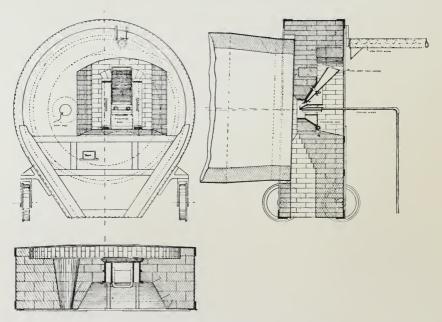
Removable Kiln-head with Matcham (natural-draught) Burner.
